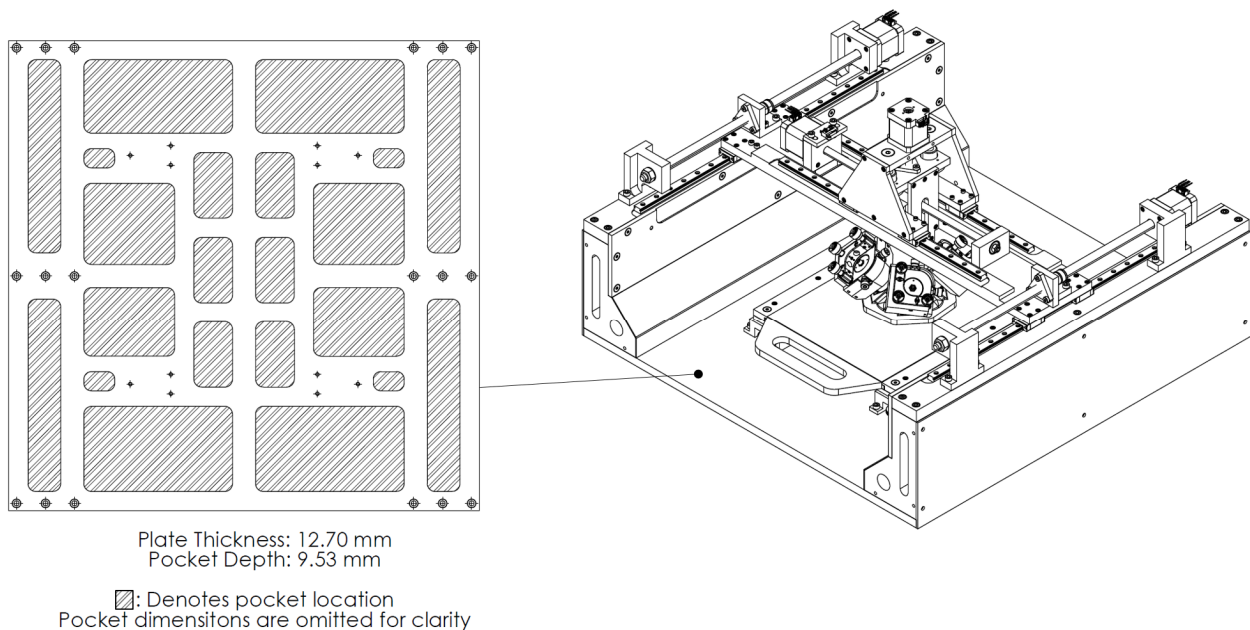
Drawing of weight-reduction pockets included in the design of the tools base plate. The inclusion of these pockets results in a 4.7 kg reduction in mass, to a final part mass that is 63% of the original design without the pockets included.
